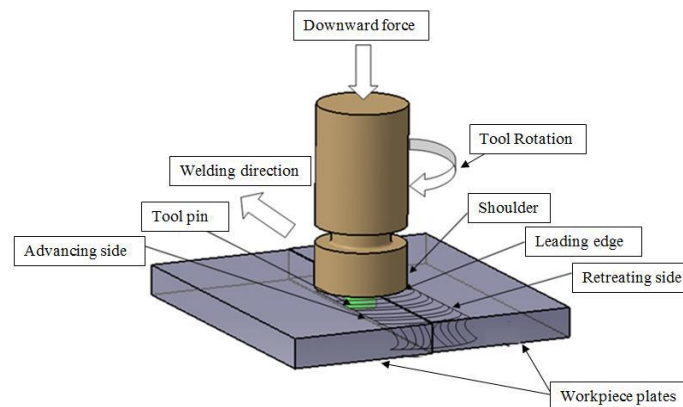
Principle of friction stir welding (Backer and Bolmsjo, 2014).
